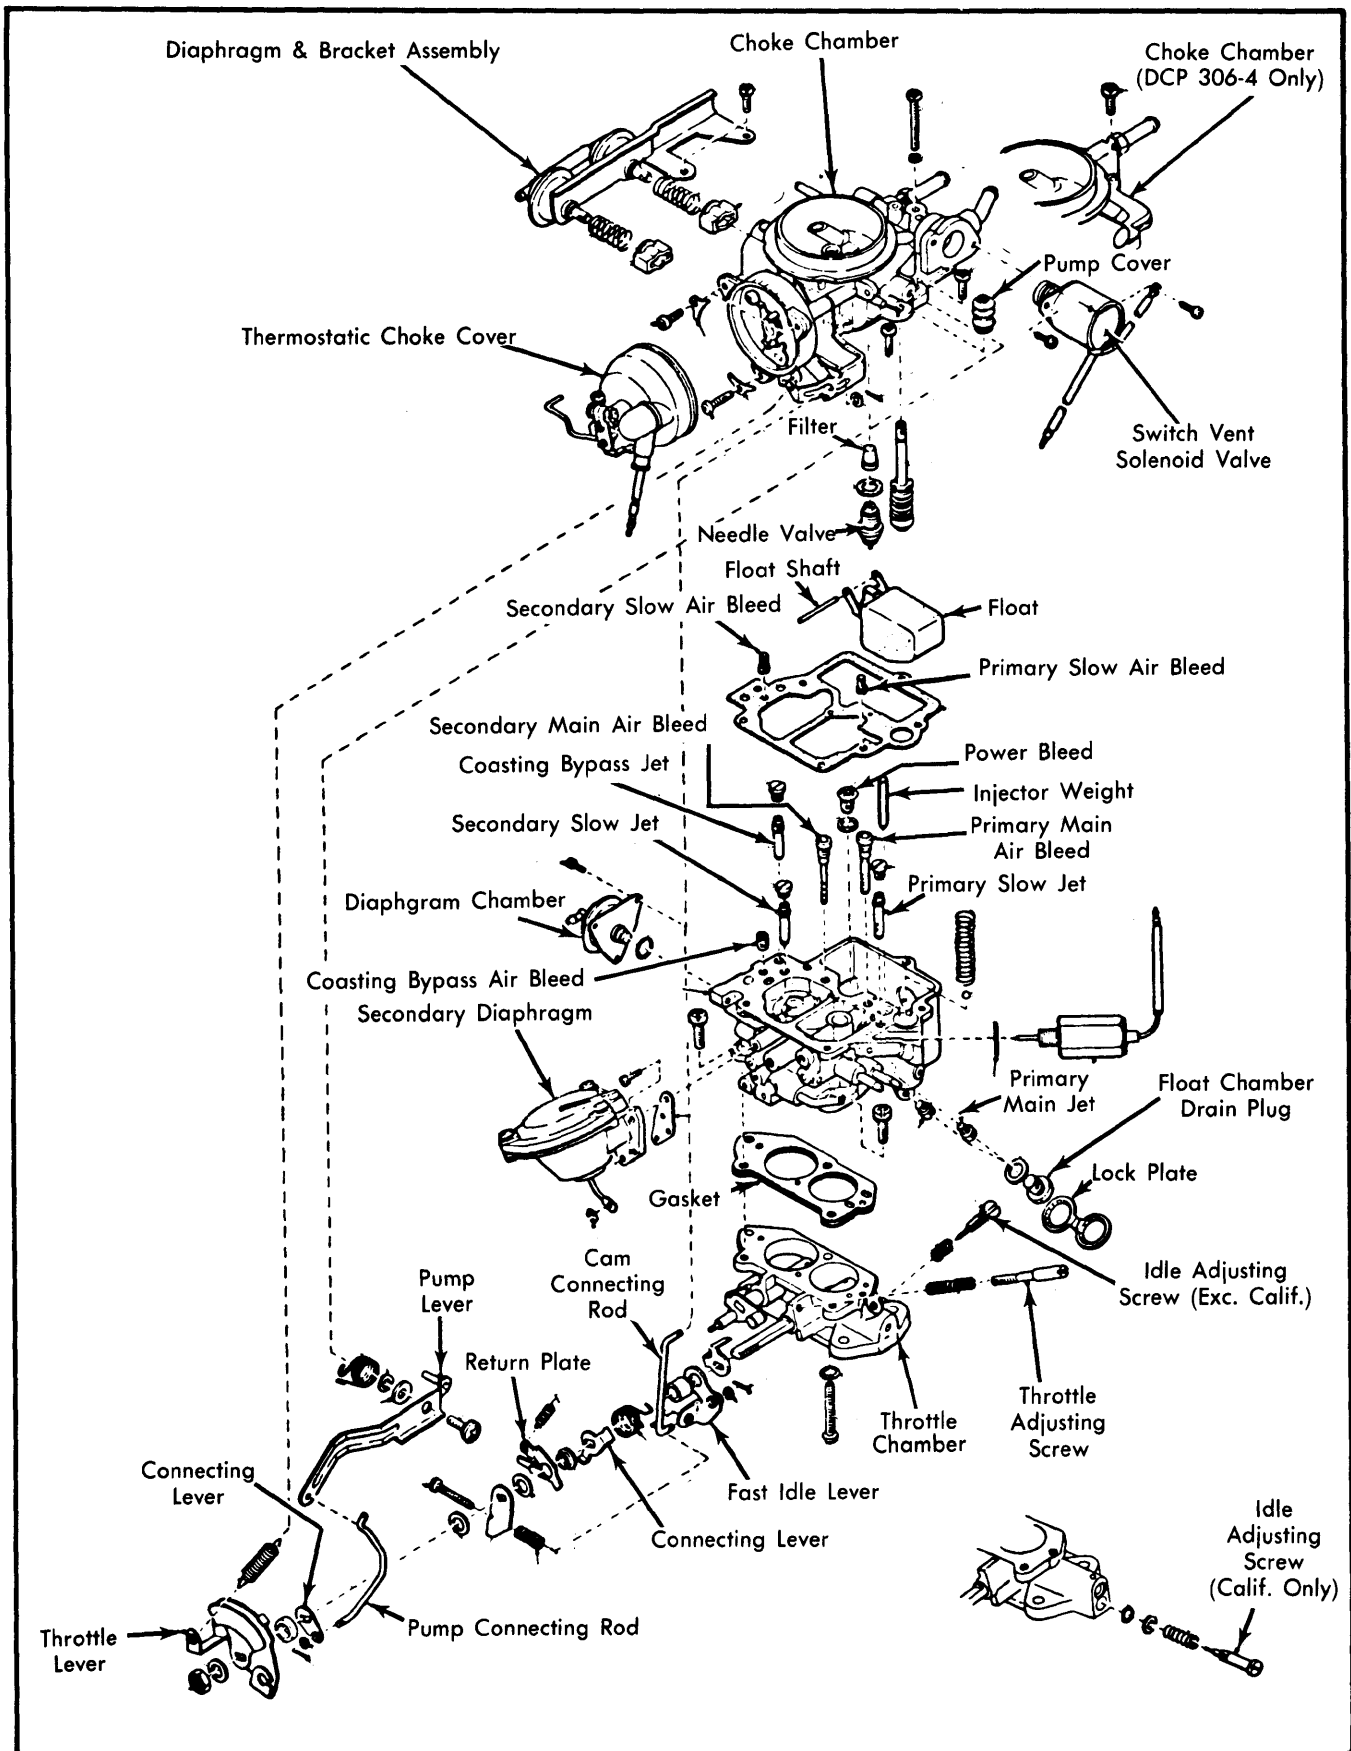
Exploded View of Subaru Hitachi DCP 306 Carburetor (DCJ 306 Similar)
